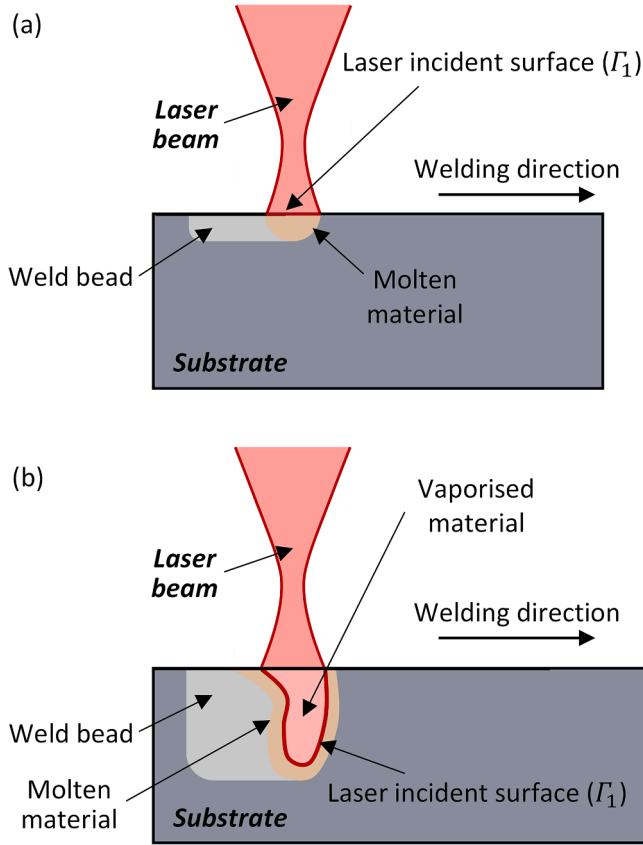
Surface where the laser heat is introduced depending on the welding mode in the LM: (a) Conduction welding and (b) Keyhole welding.
